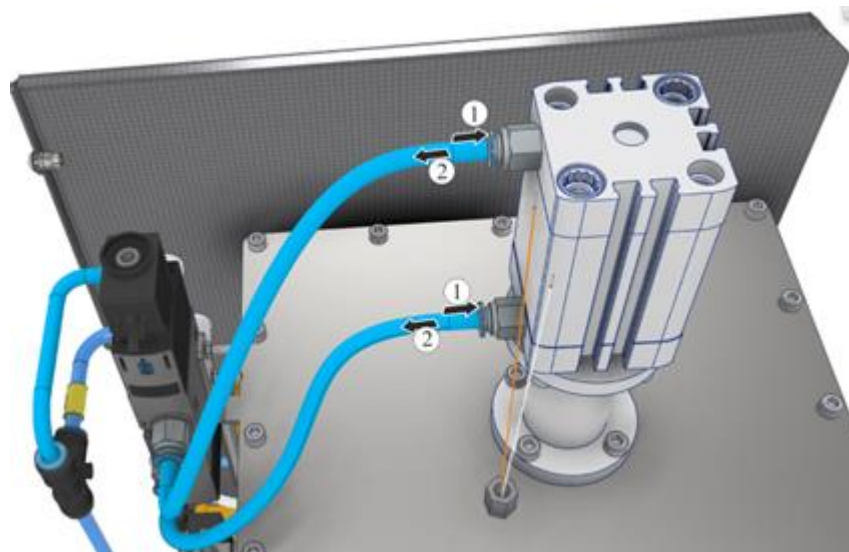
Dismantling the pneumatic hose and valve plug (only model VL 01/12 LB Press)
